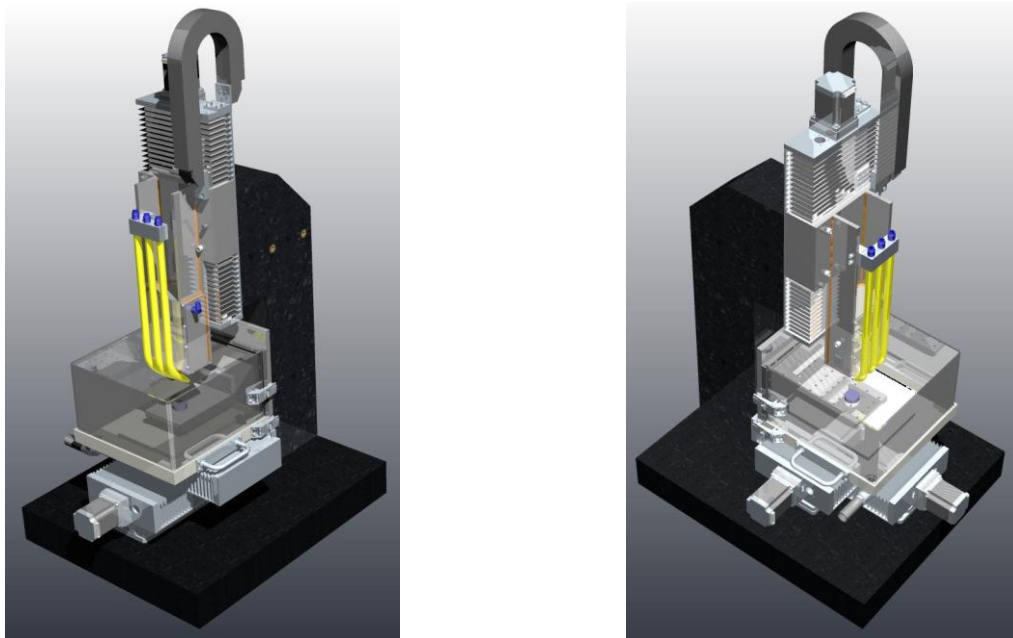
Design of the EC/EDMM hybrid sequential machine-tool developed in Cracow University of Technology.
